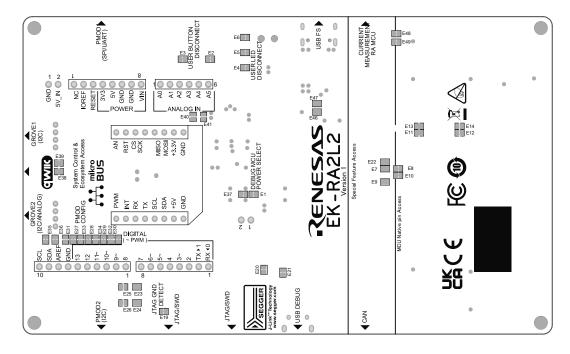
Layout Diagram of Components on the EK-RA2L2 Board (Bottom View)
